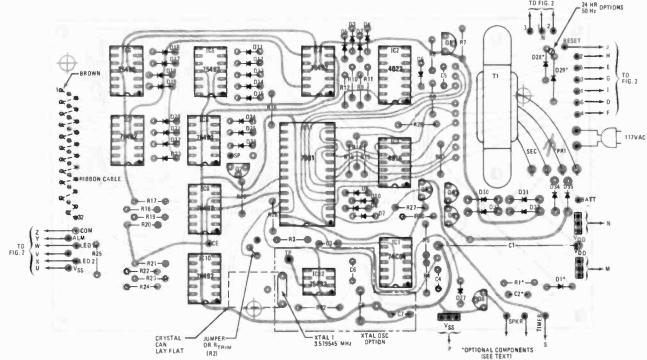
COMPONENT PLACEMENT diagram of clock board.
